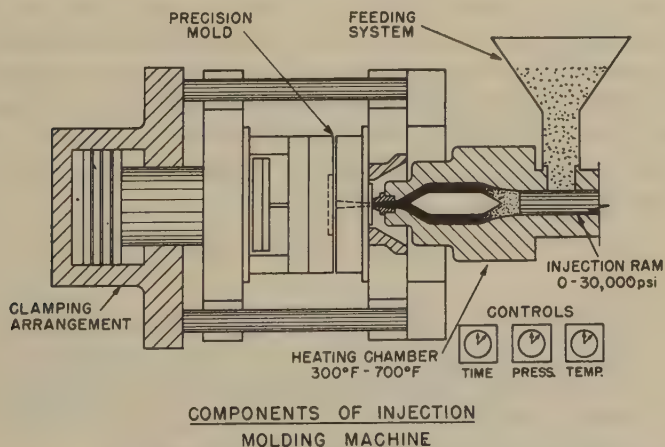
Schematic drawing of an injection molding machine, comprising: (a) feeder, (b) plunger, (c) tunnel, (d) mold, (e) clamping device, and (f) controls.
